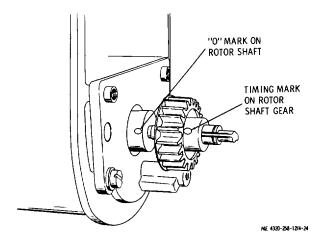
Timing marks on distributor gear and rotor shaft.
